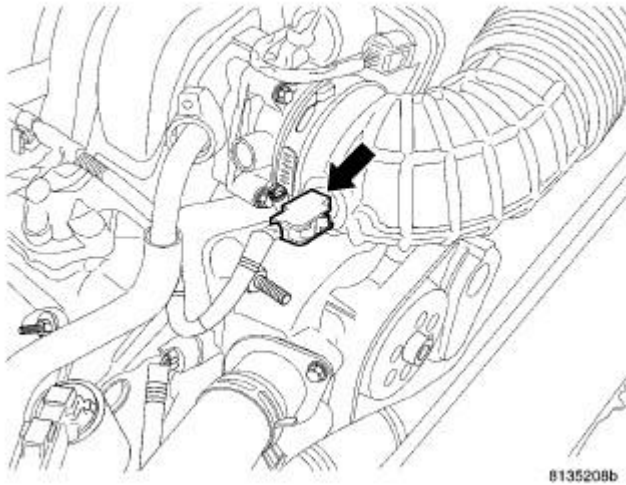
Locating Inlet Air Temperature Sensor - 5.7L
